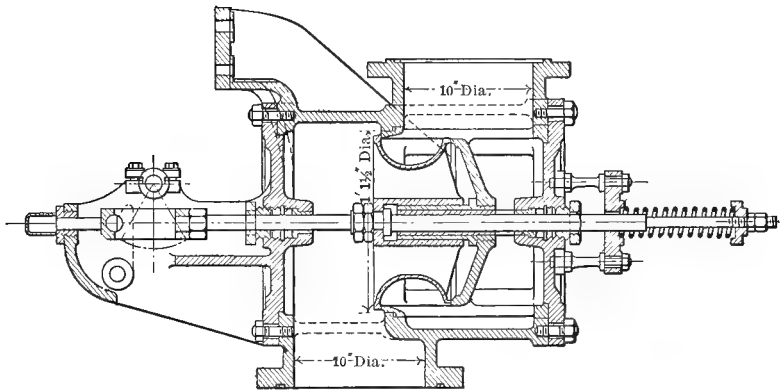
Mechanically Operated Pump Return Valve (English Design).
